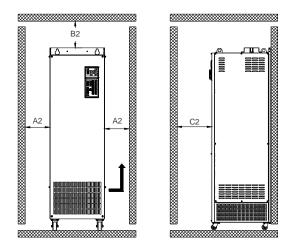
Mounting clearances for AT900-4T250G to AT900-4T450G
